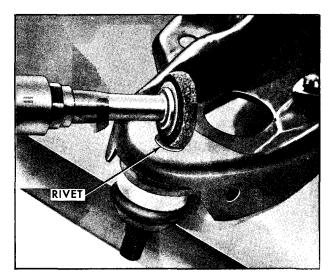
Removing Lower Spherical Joint Center Rivet
